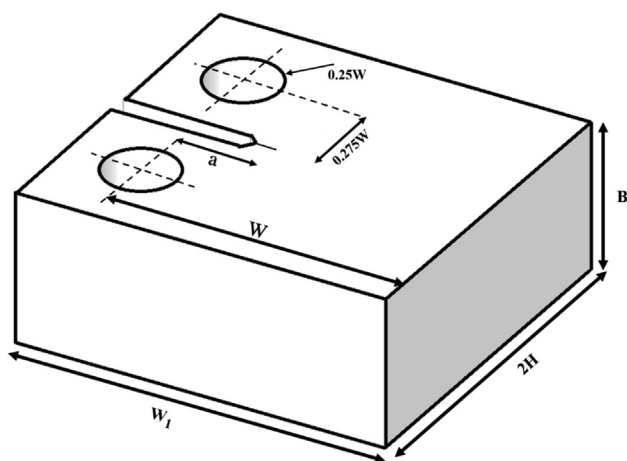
Geometry of DCB specimen for fracture test (a = 10 mm).
